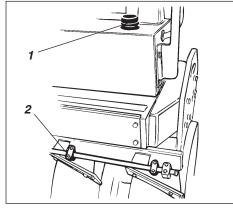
Wheel rack 1. Filler cap 2. Nozzle (one for each tire) Make sure that the scrapers are undamaged. Adjust the scrapers so that they lie 1–2 mm from the drum. For special asphalt compounds it may be better if the scraper blades (1) lie lightly against the drums.
